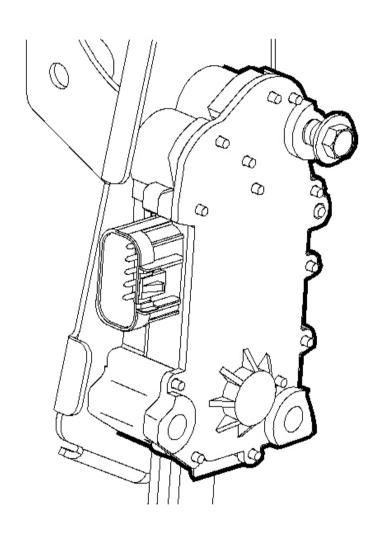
View Of APP Assembly From The Vehicle Courtesy of GENERAL MOTORS CORP.
